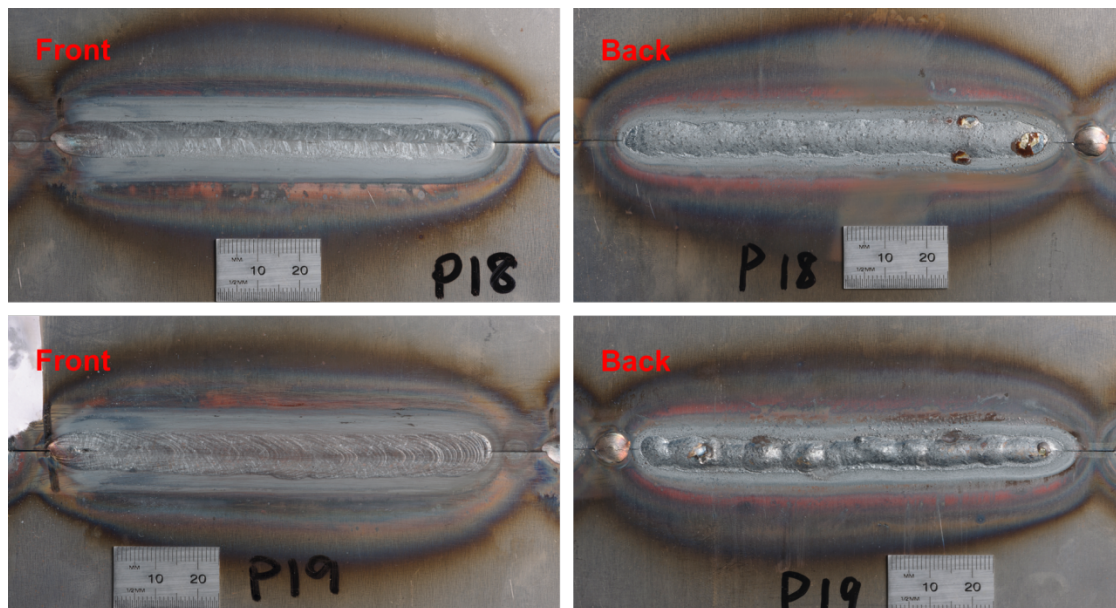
Photographs of the weld pass 18 and 19.
